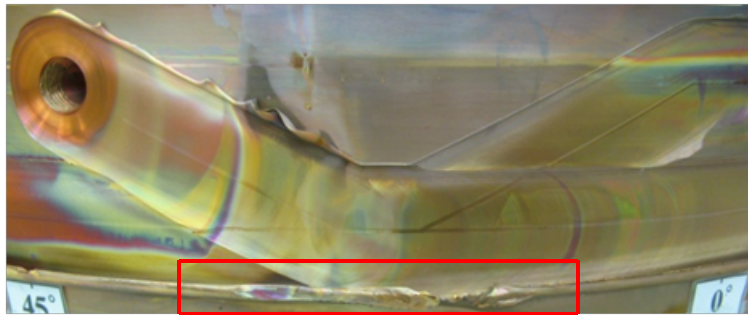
Extensive flash formation on the advancing side of the weld (the red box) due to excessive plunge depth.
